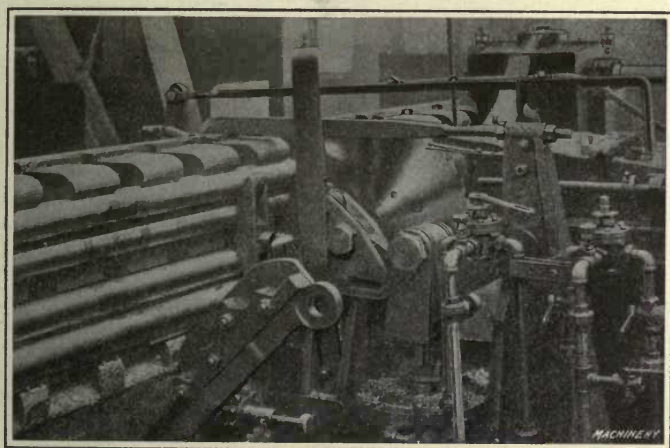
Cutting Turned Bars to Shell Lengths in a Newton Cold Sawing Machine
